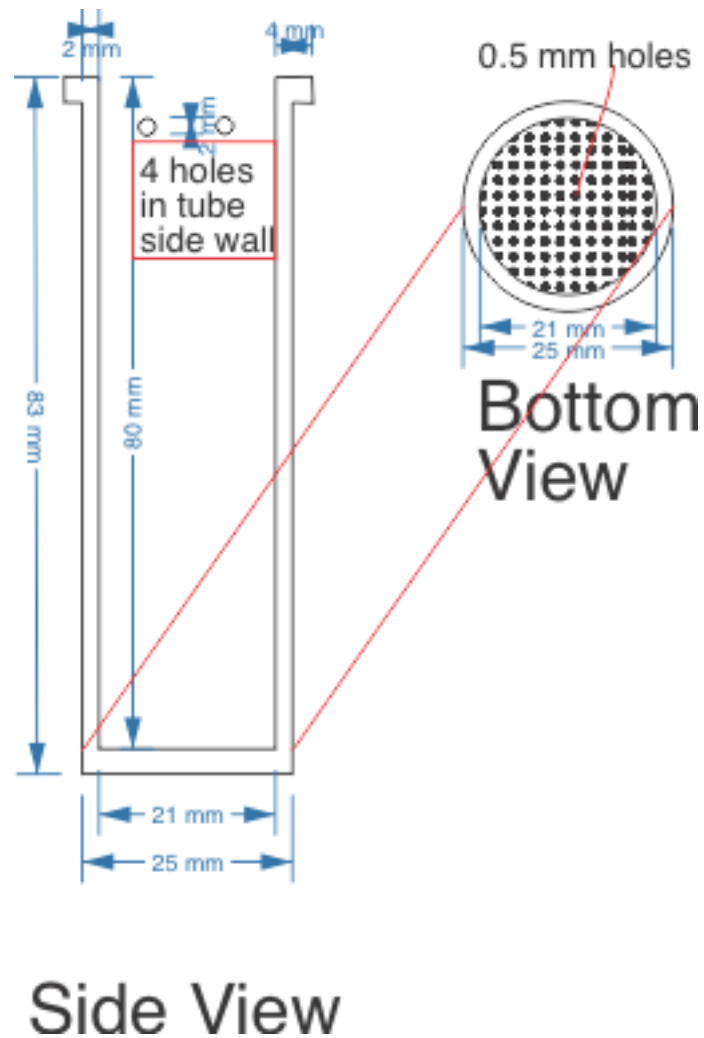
Centrifuge tube insert used to extract pore water from sediment samples
